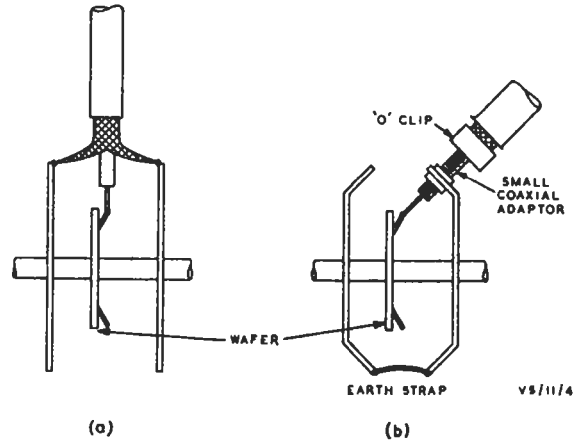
Connection of Coaxial Cable to Switch Wafer
